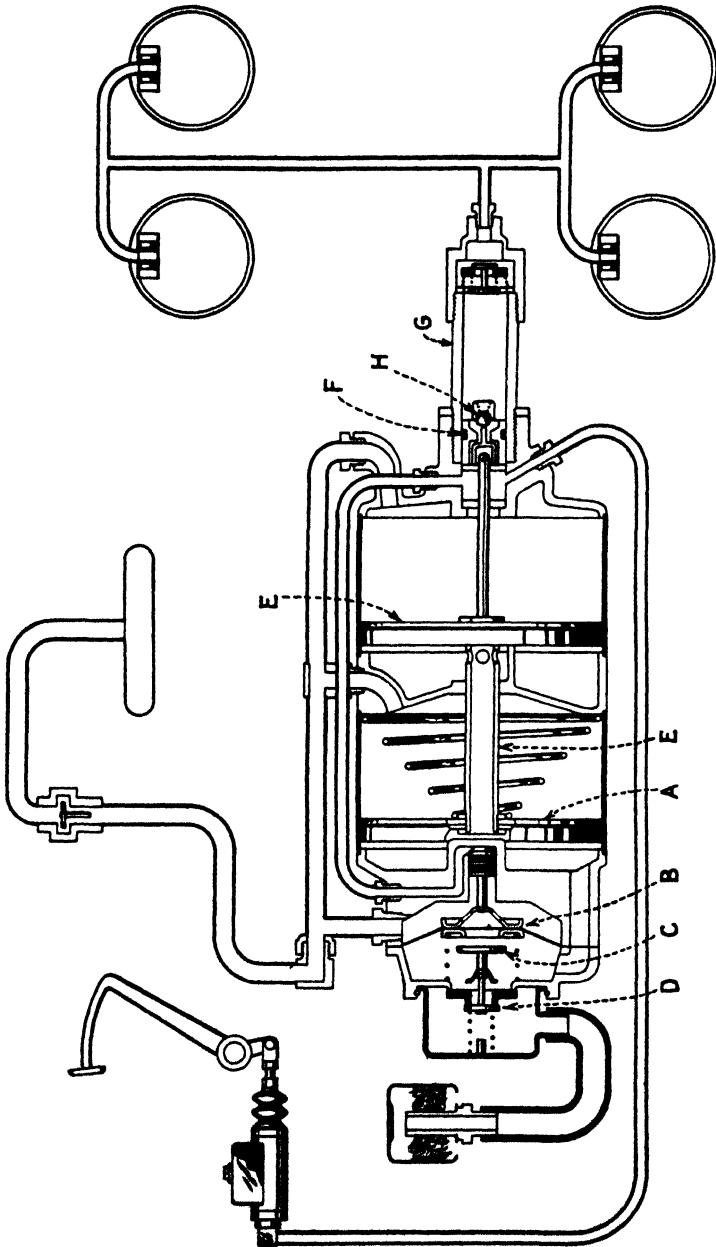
SCHEMATIC DRAWING OF BENDIX HYDROVAC BRAKING SYSTEM.
